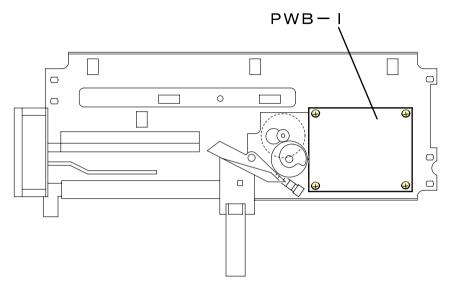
PWB-I (Belt Cleaner Control Board) Removal
